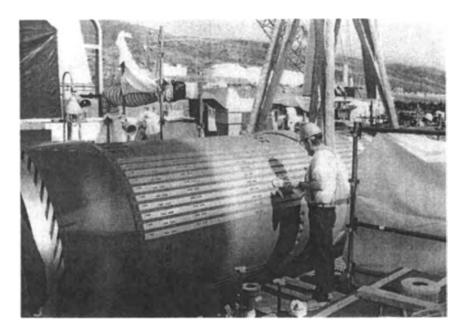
Applying masking tape to vent holes of a large 4-pole turbogenerator rotor, with the purpose of eliminating contamination of rotor winding.
